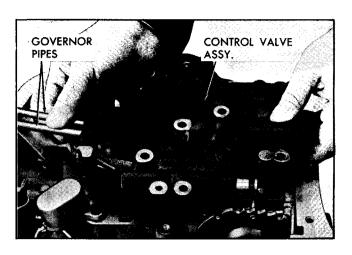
E-47 Removing Control Valve Assembly and Governor Pipes
